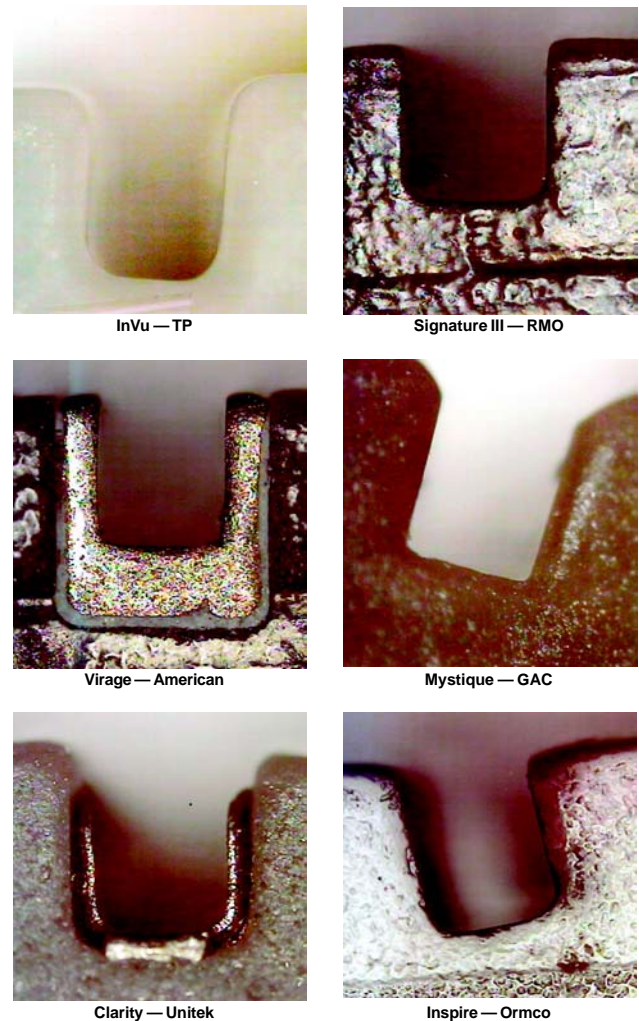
Comparison of smooth injection molded surface of InVu to rough machined surface of other ceramic brackets.
